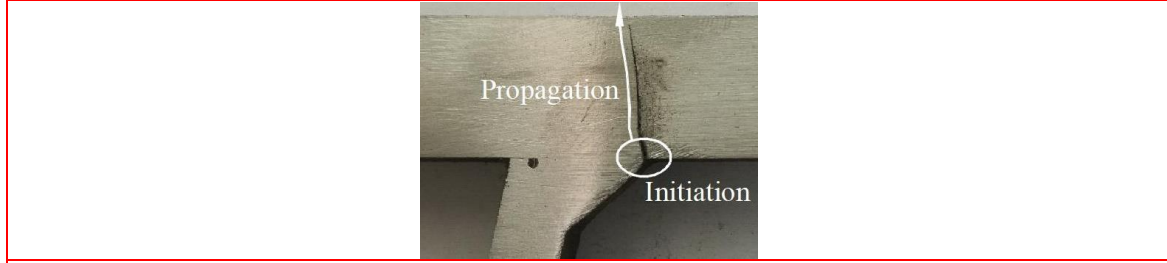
Cracking pattern measured on the macro-section of CU-4
